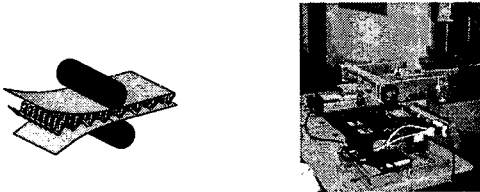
(c) Concept of multipoint resistance welding and its apparatus
